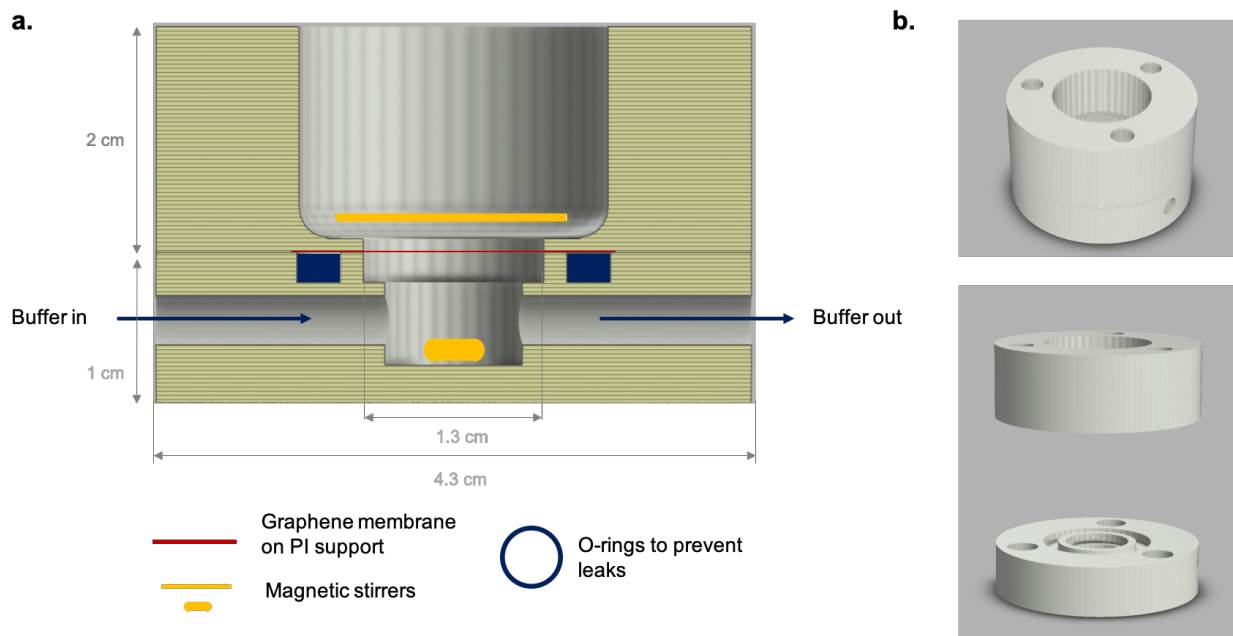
CAD drawings of device prototype. a) Device components and dimensions. b) Device assembly
